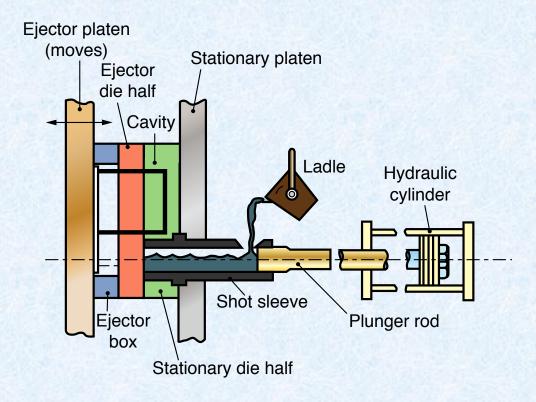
Schematic illustration of a die casting machine. *Source:* From Kalpakjian and Schmid [2010].
